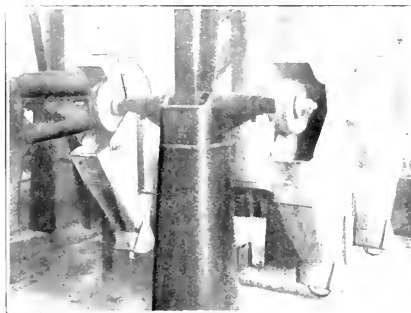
An excellent example of blow pipe installation and buffing wheel hood, well trapped, in plant of the Victor Talking Machine Company.
